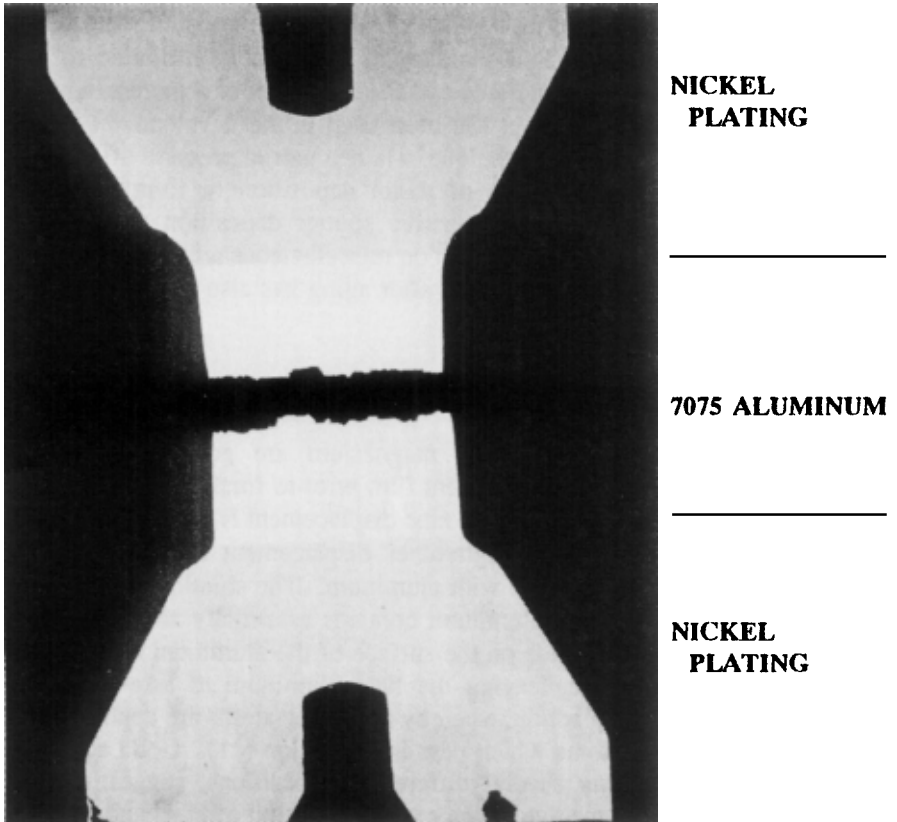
Cross section of nickel plated 7075 aluminum conical head tensile specimen after testing. Magnification is 6 ×.
